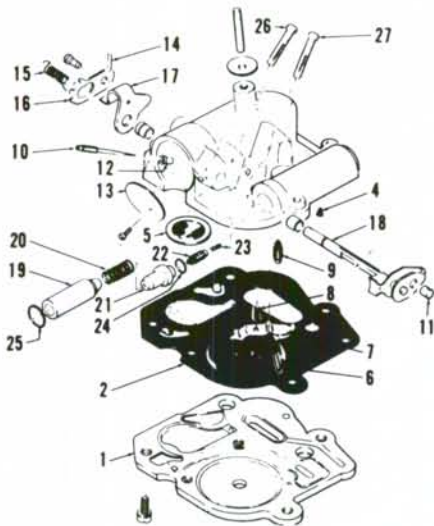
Exploded view of early McCulloch Model "W" series carburetor. Refer to Fig. MC6-1 for view of carburetor installed.
